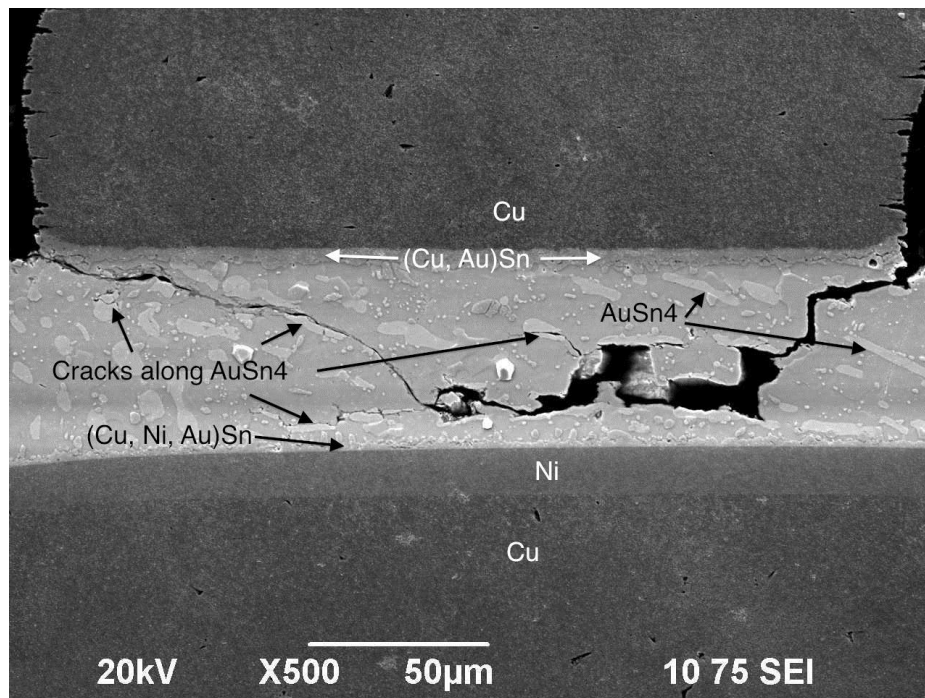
Fracture in AuSn₄ IMC in the bulk solder, a QFN component on a thick Au board, after thermal aging for 56 days
